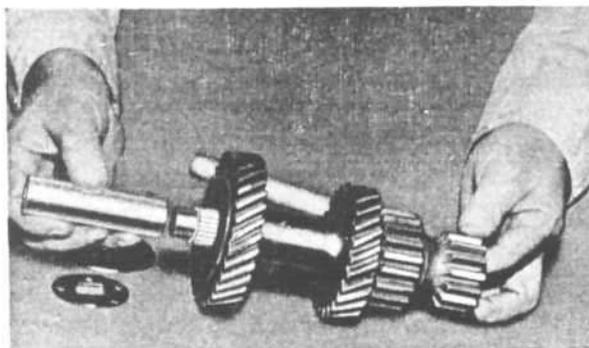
COUNTERSHAFT GEAR BEARING ARBOR
